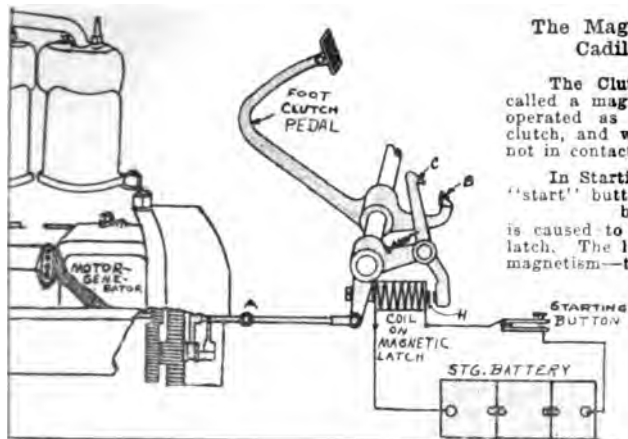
On the 1914 Cadillac There is a Magnetic Latch used in connection with Clutch Pedal to shift gears for starting on the Delco starting system.
